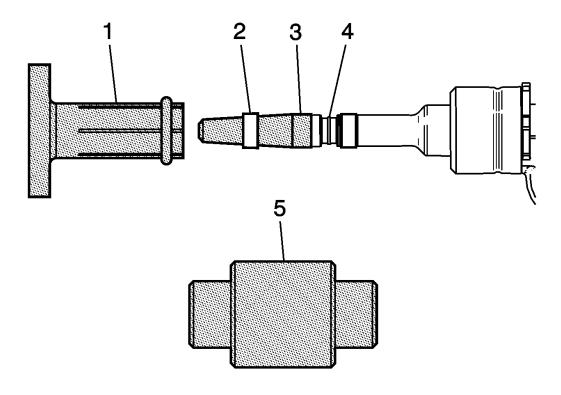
Installing Seals With Short Protector Courtesy of GENERAL MOTORS COMPANY
